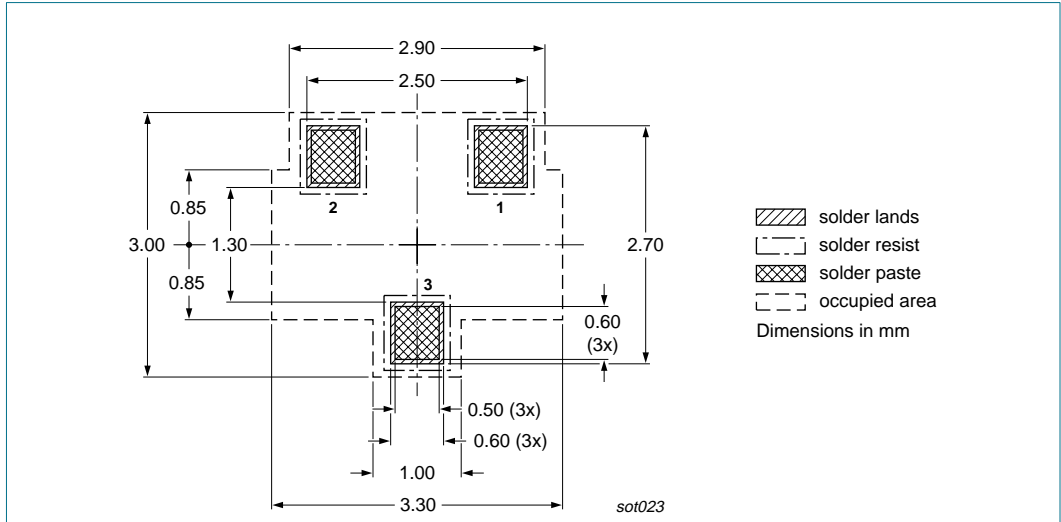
Reflow soldering footprint SOT23 (TO-236AB)
